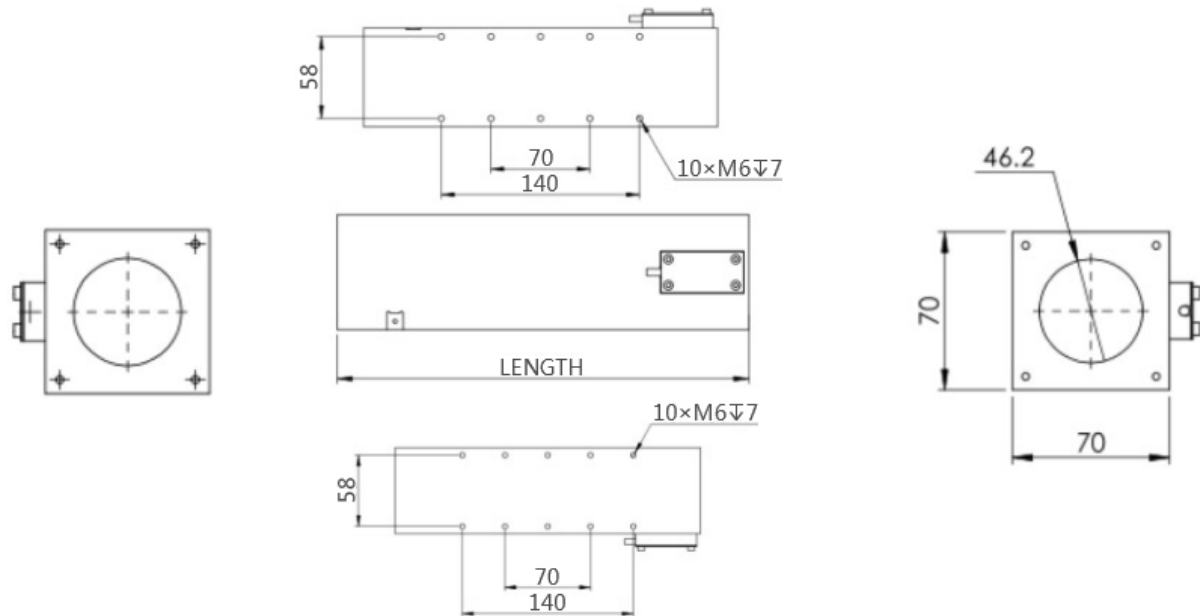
Outline dimensional drawing of WZCR-B32 series coil
